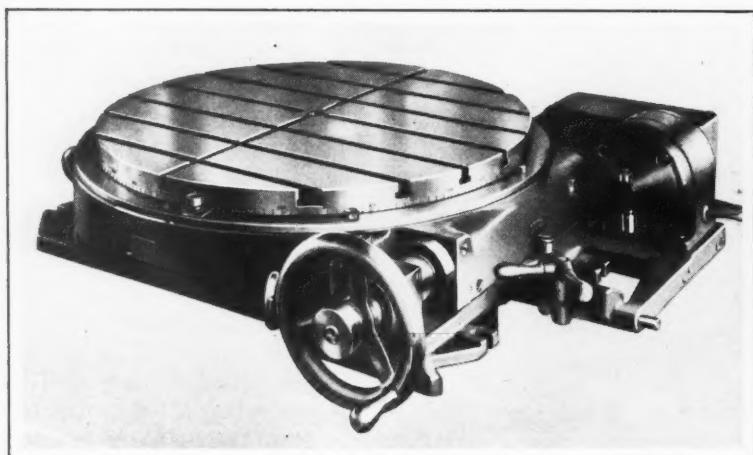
Rotary Indexing Jig Borer Table, 30 Inches in Diameter
